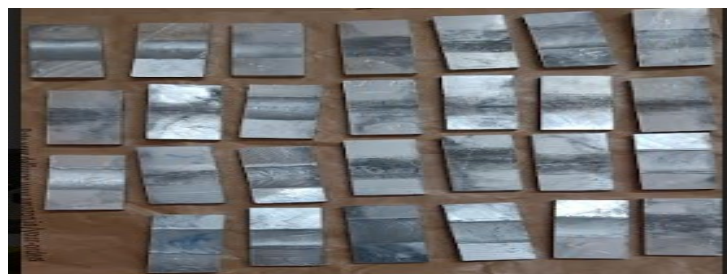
Photograph of fabricated Friction Stir welded hardness test specimens
